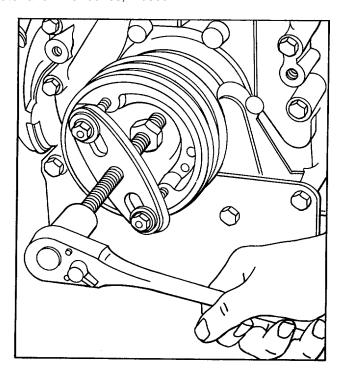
Removing Crankshaft Pulley Using Puller J 24420
